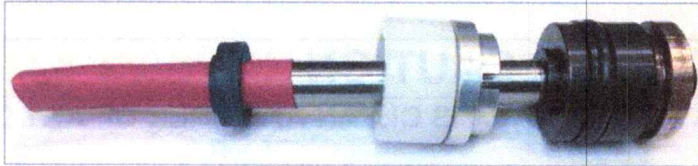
COMPRESSION RING installed onto PISTON GUIDE.
